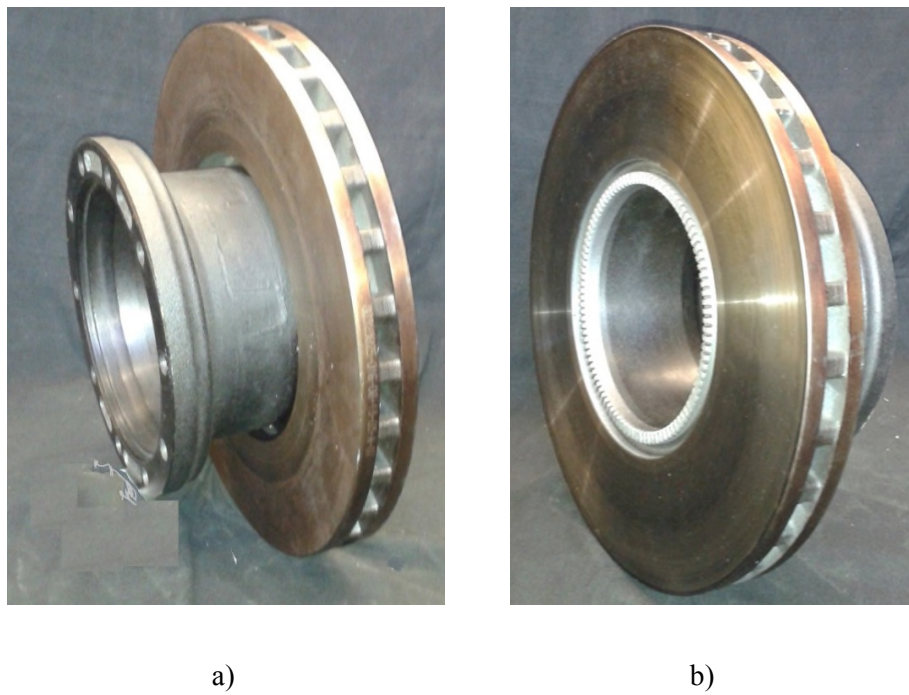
Brake disc analysed: a) Outboard view; b) Inboard view
